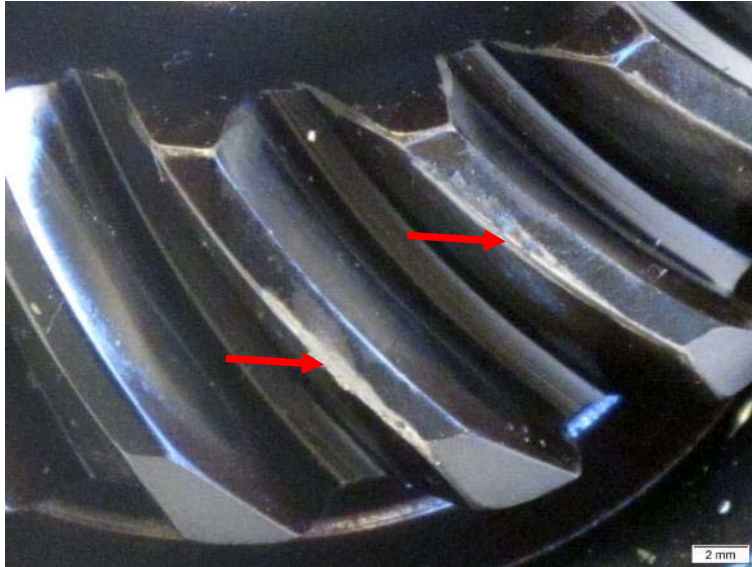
Damaged tooth crest edges of the bevel pinion (red arrows)
